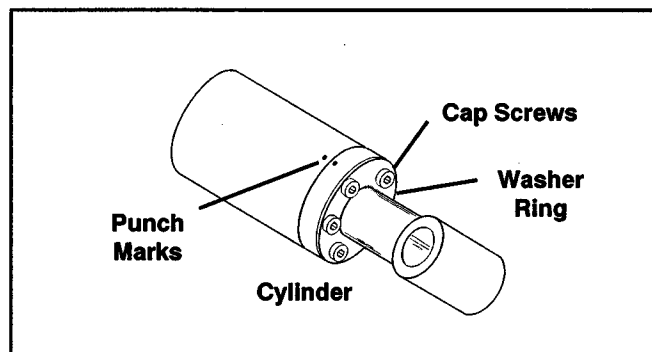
Cylinder Head Retainer Cap Screw Removal.
